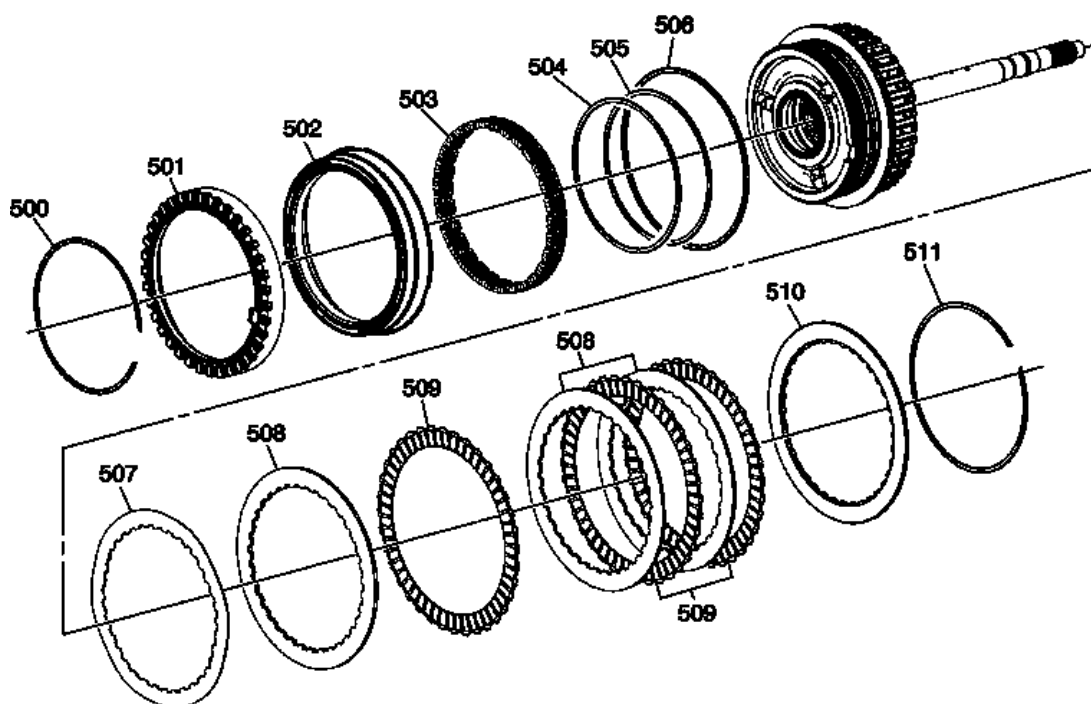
3-5 Reverse Clutch Assembly Components - Gen 2
